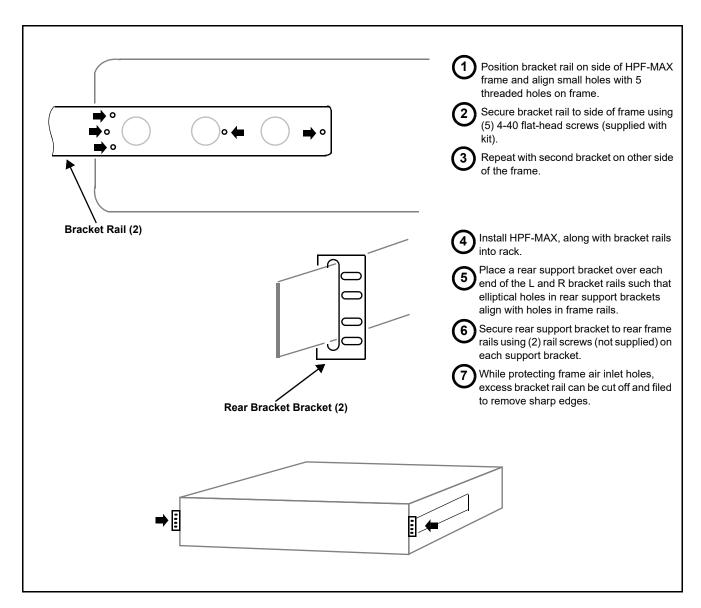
Frame Support Bracket Kit 9000-FSB Installation
